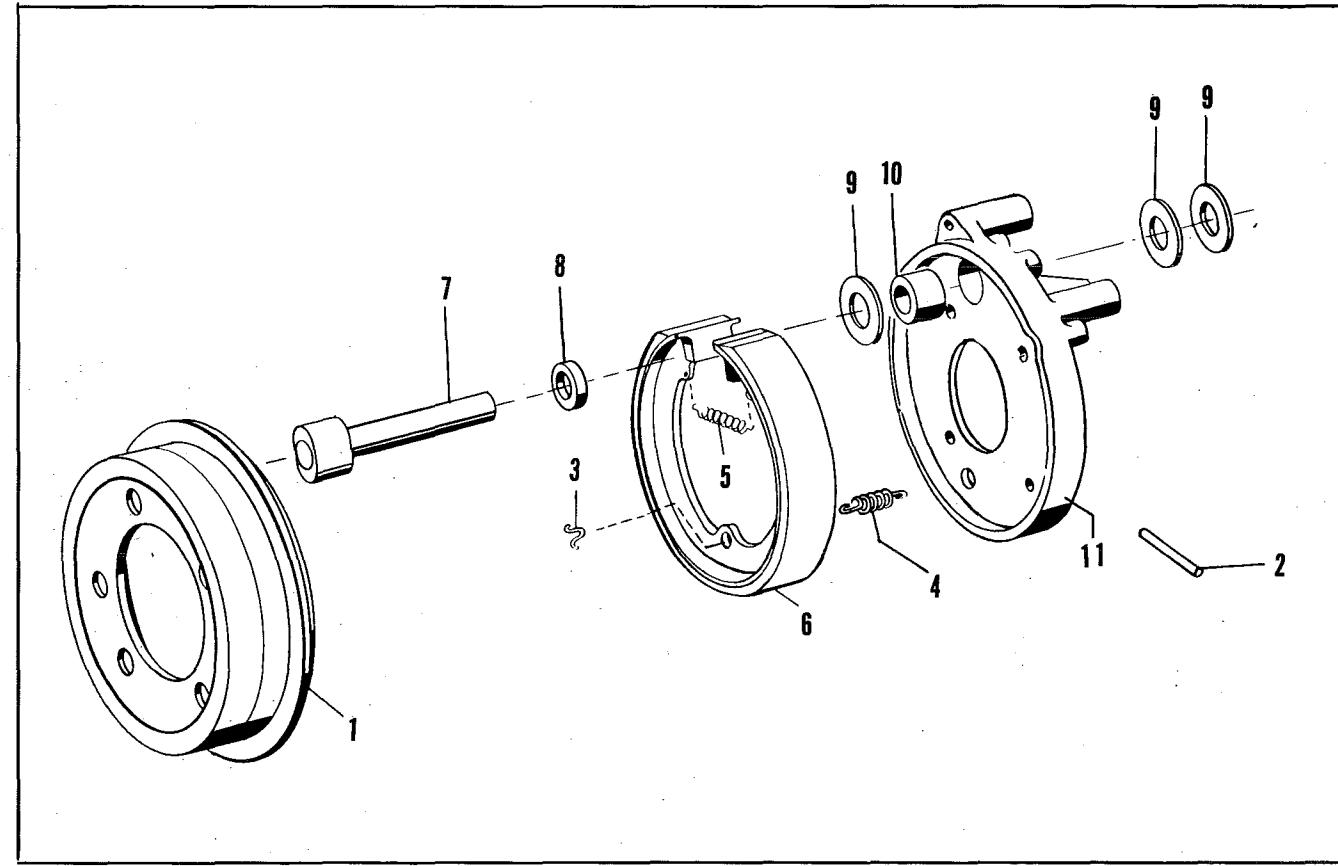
Brake Assembly, Part Nos. 51682L and 51682R
